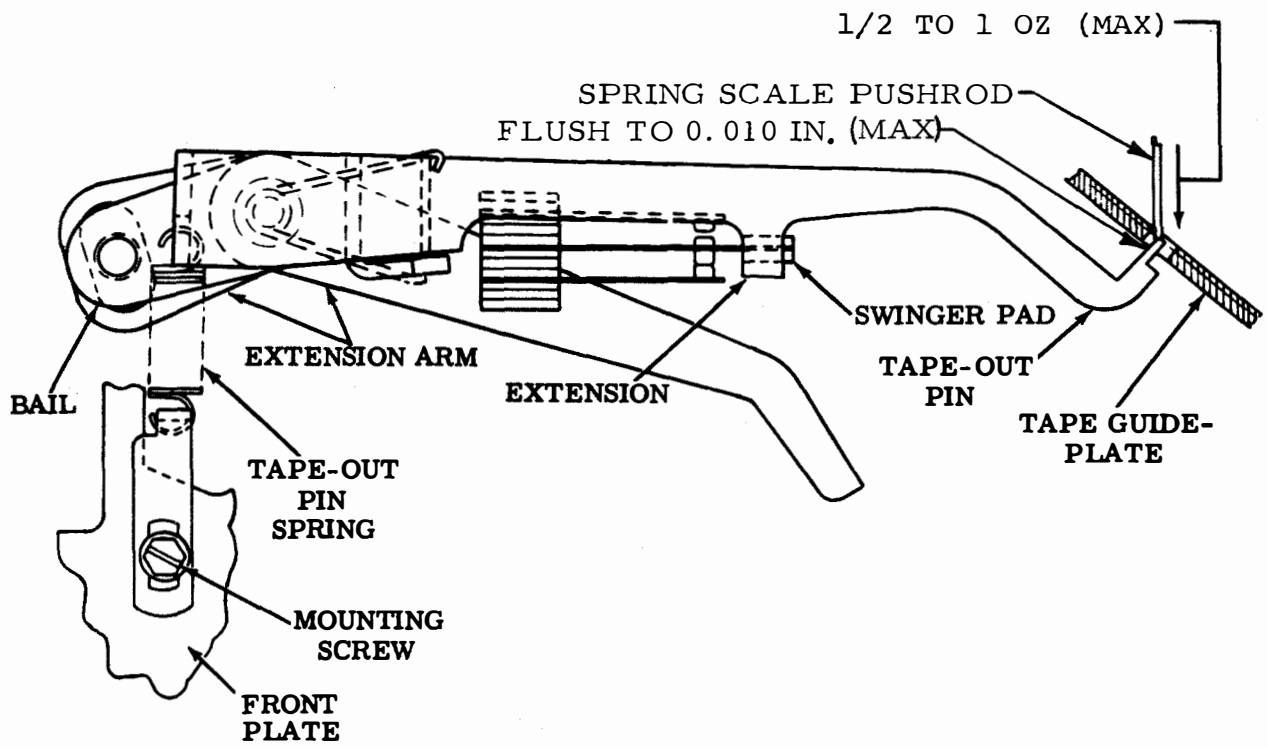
Tape-Out Pin Spring and Tape-Out Pin, Front View
